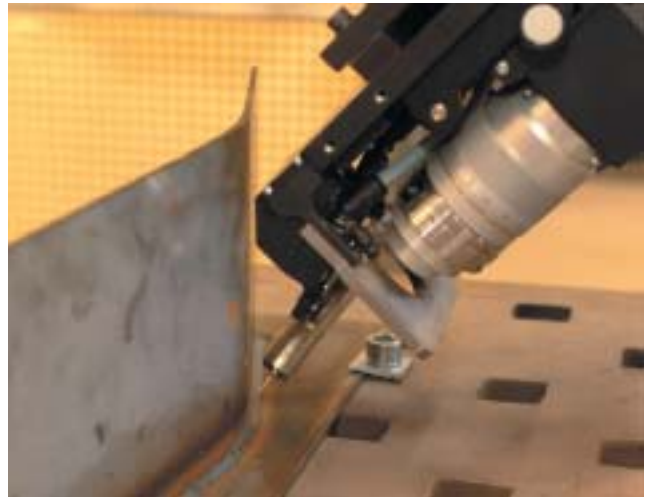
The picture shows that the weld can be optimized to suit specific requirements. In this case deep penetration and spatter-free welding were requested – and fulfilled. As a bonus a welding speed of almost 2 m/min was achieved.
